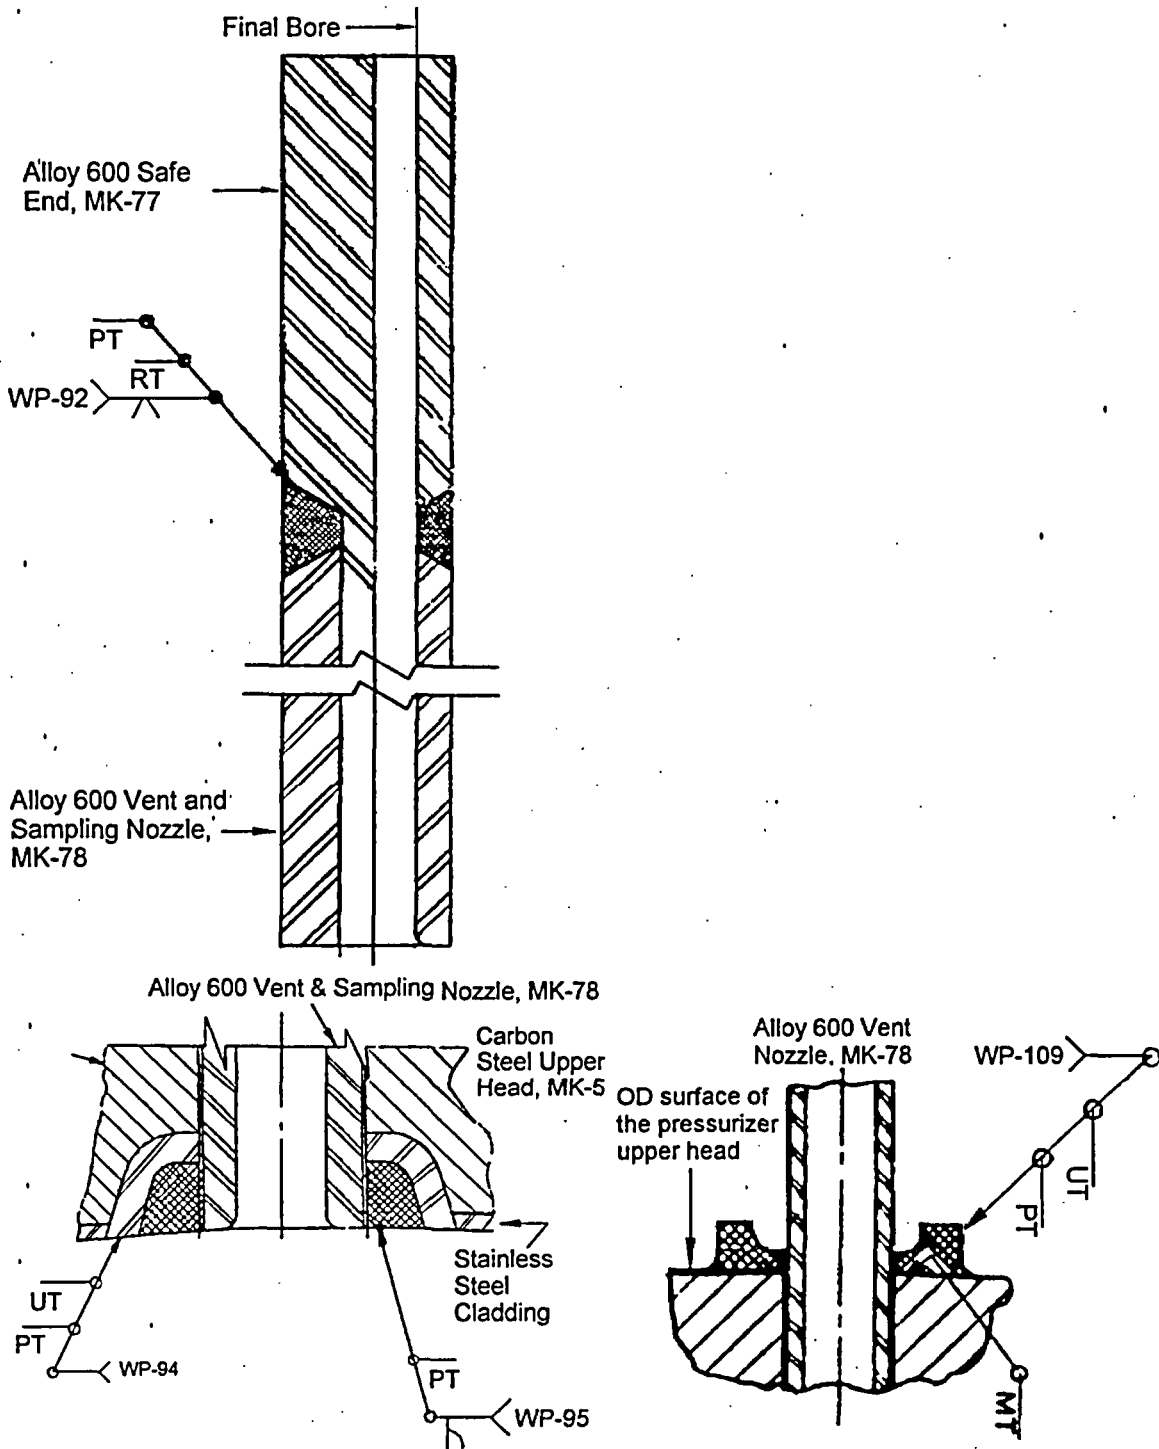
B - Top, 1-inch Schedule 160 Alloy 600 vent to Alloy 600 safe-end weld. Bottom, detail of the 1-inch vent and sampling nozzle to pressurizer upper head J-groove weld and weld boss (not wetted by RC).
